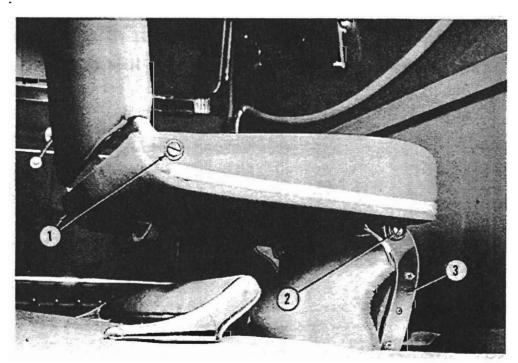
The Folding Seat Can Be Disassembled by Removing the Screws Indicated.
